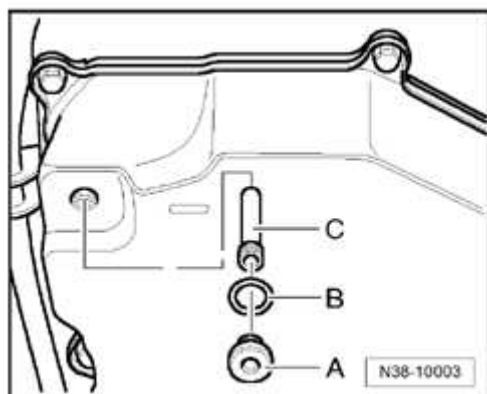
Identifying Overflow Tube, Check Plug And Sealing Ring
